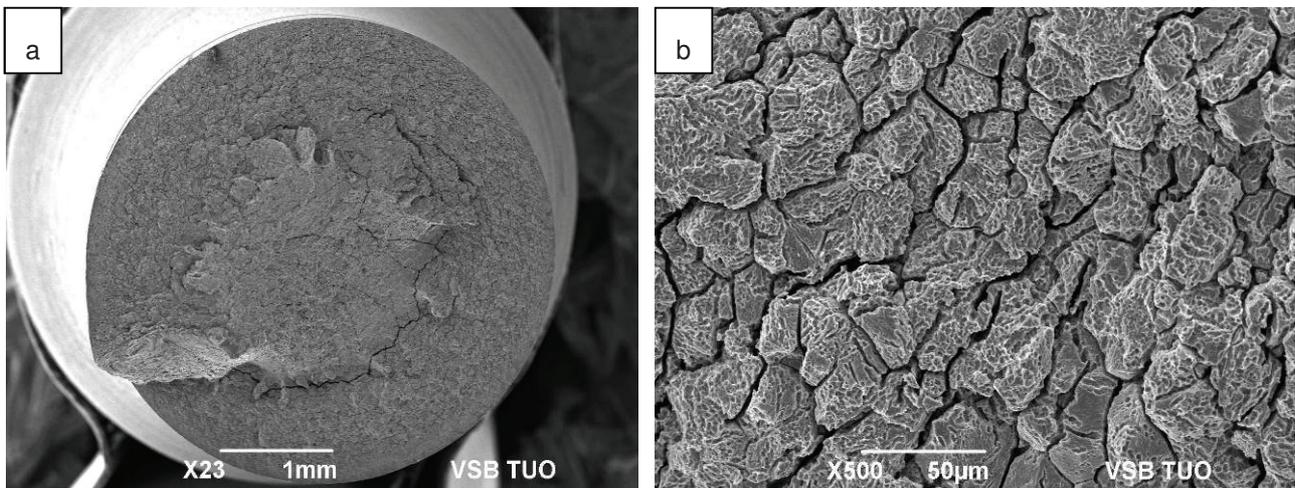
Fracture surface of SSC specimen a) general view, b) area close to the surface
